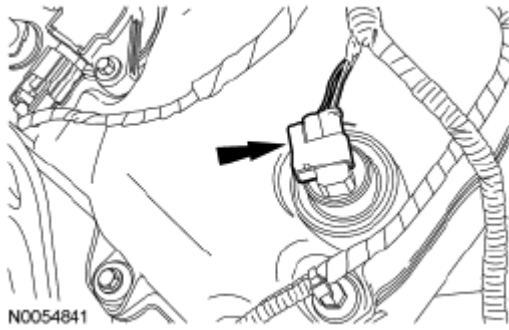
Locating RH Variable Camshaft Timing (VCT) Solenoid Electrical Connector
